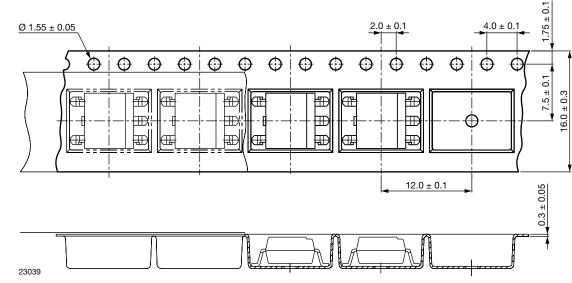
Tape and Reel Packaging (1000 pieces on reel)
